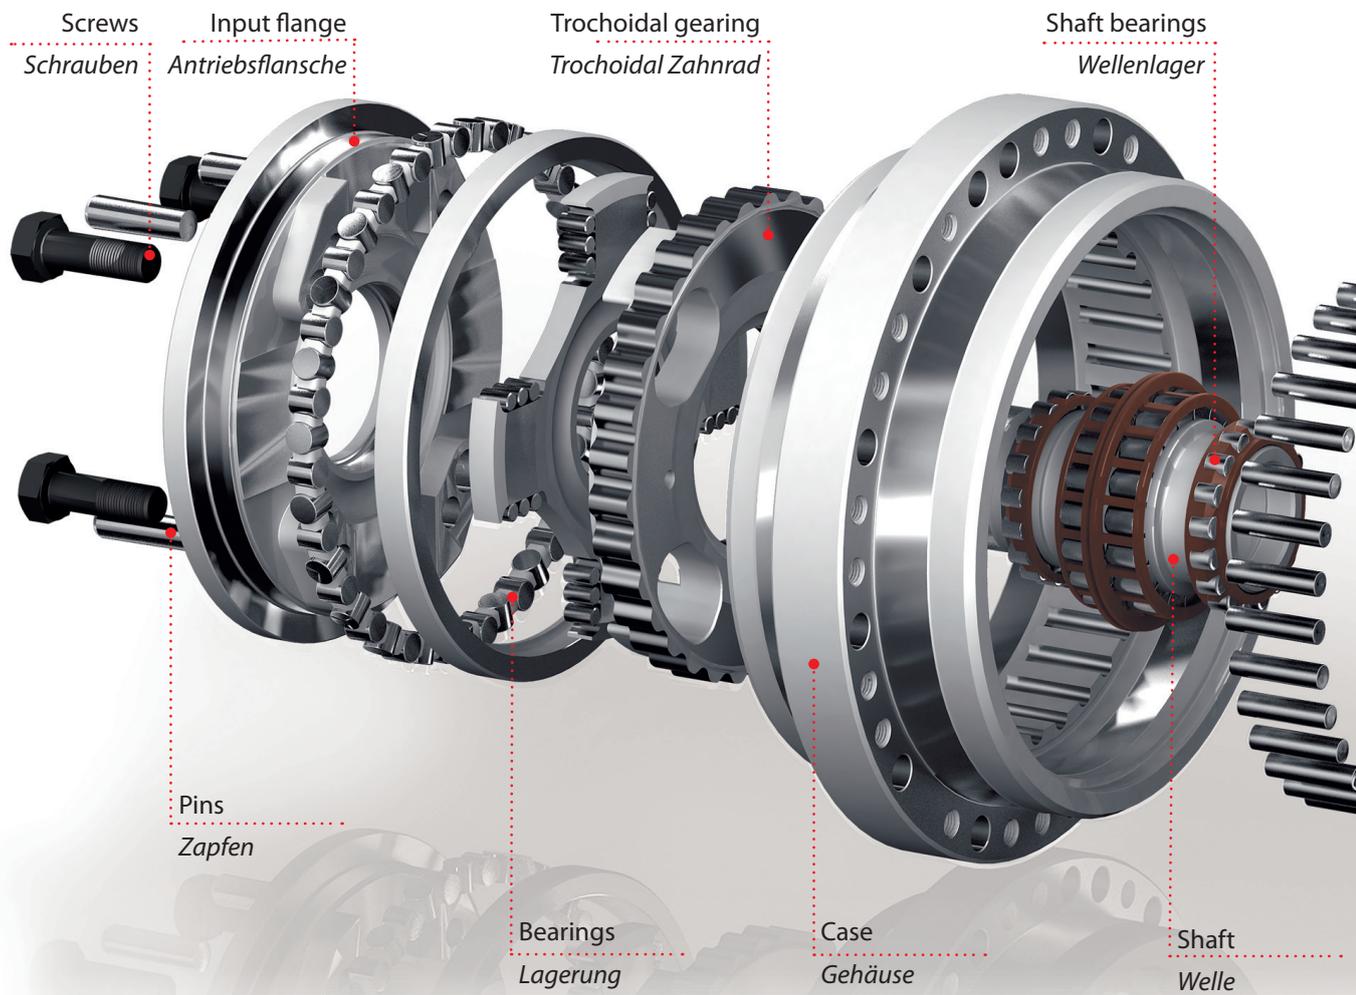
Components of TwinSpin reduction gears | *Getriebe Komponenten TwinSpin
